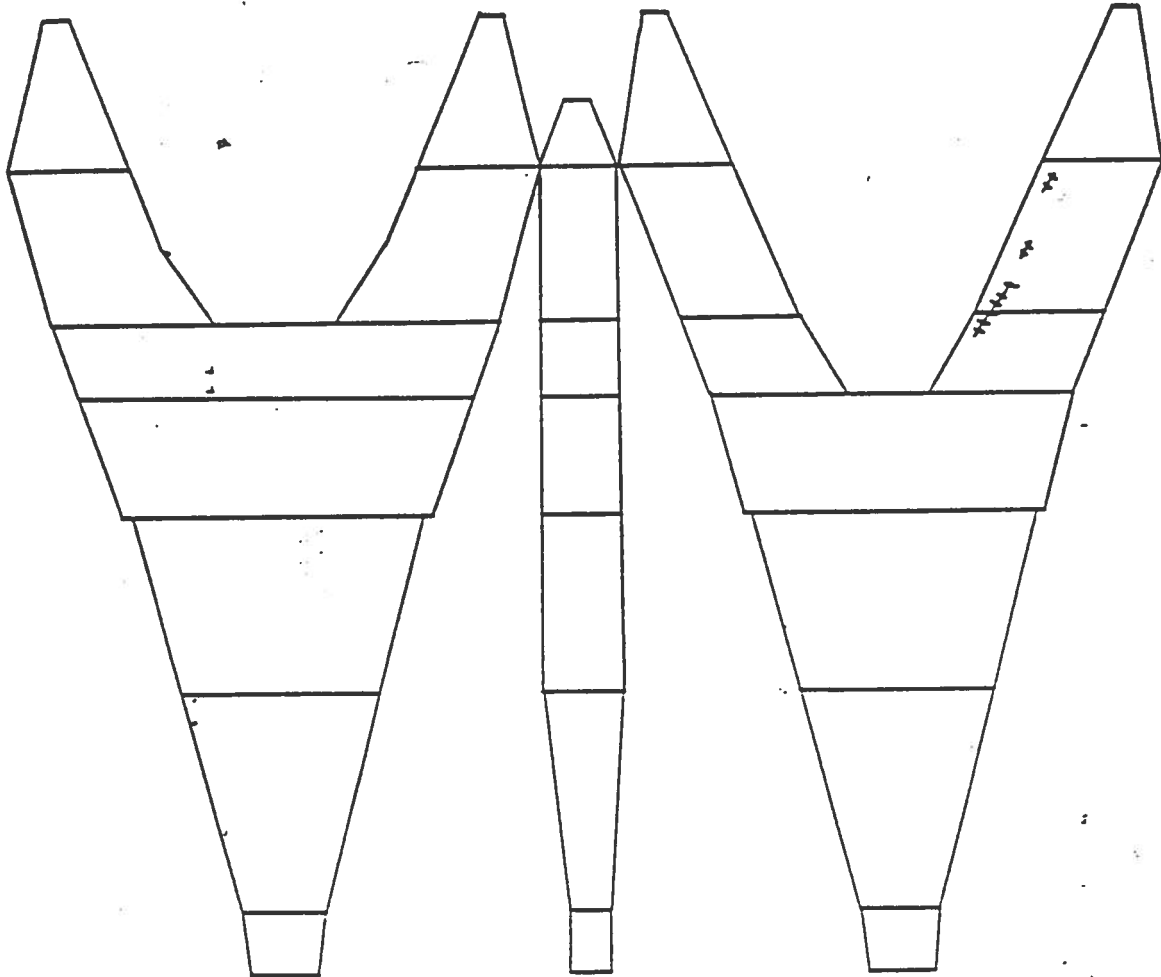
Tearing damage (3 lesser holes) in starboard lower wing (AT6).
